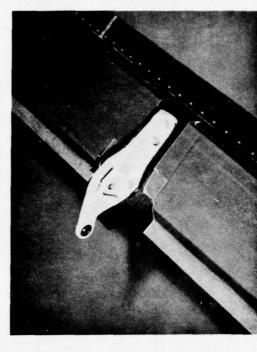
OUTBOARD HINGE ASSEMBLY INSTALLATION
